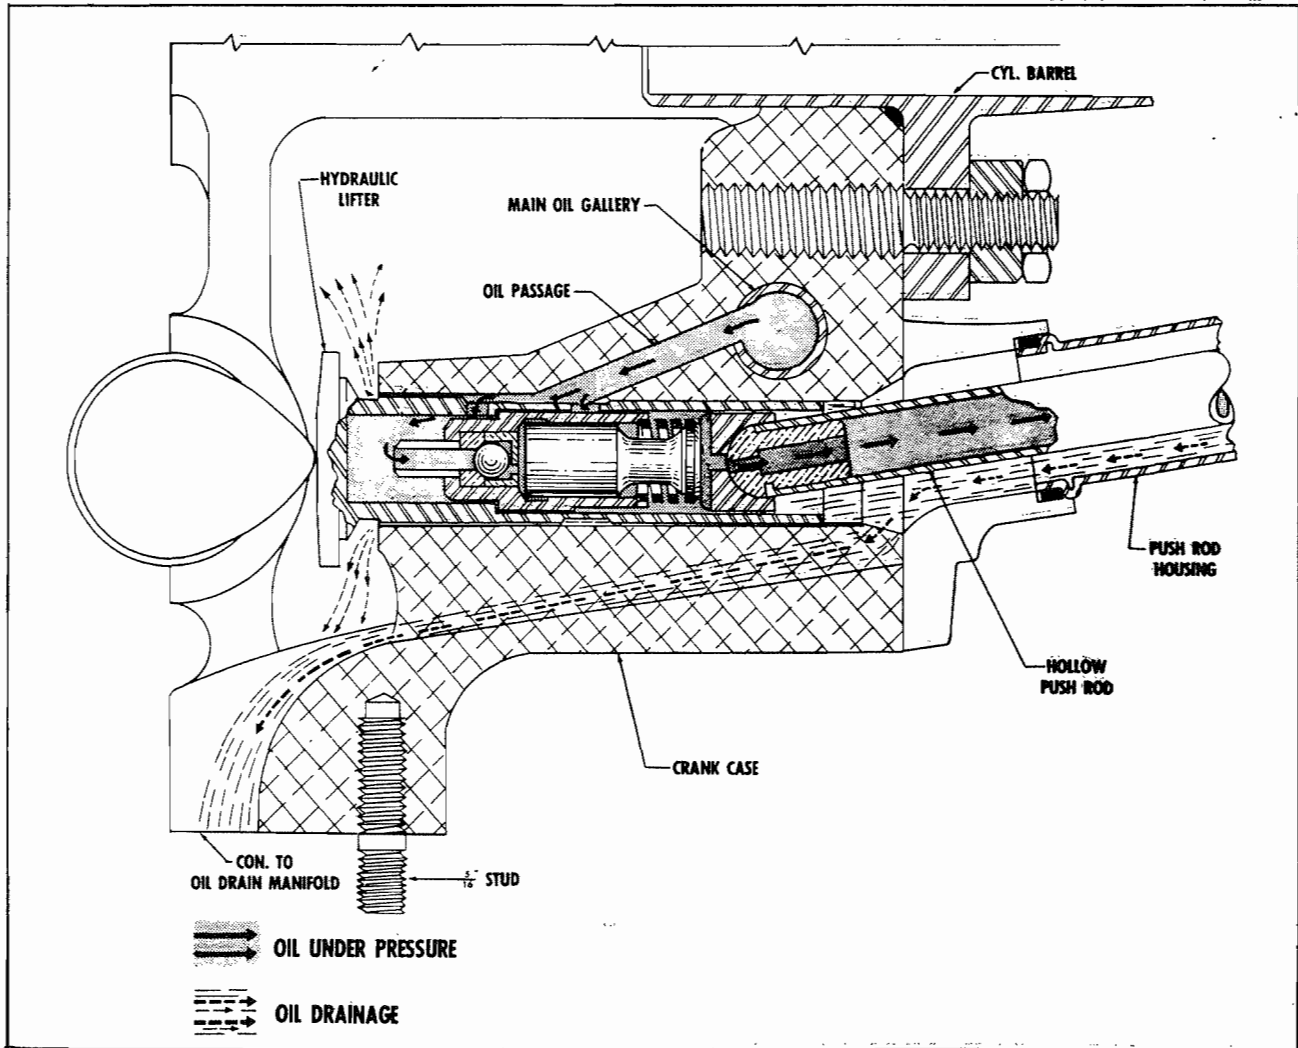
CROSS SECTION THROUGH HYDRAULIC VALVE LIFTER.
